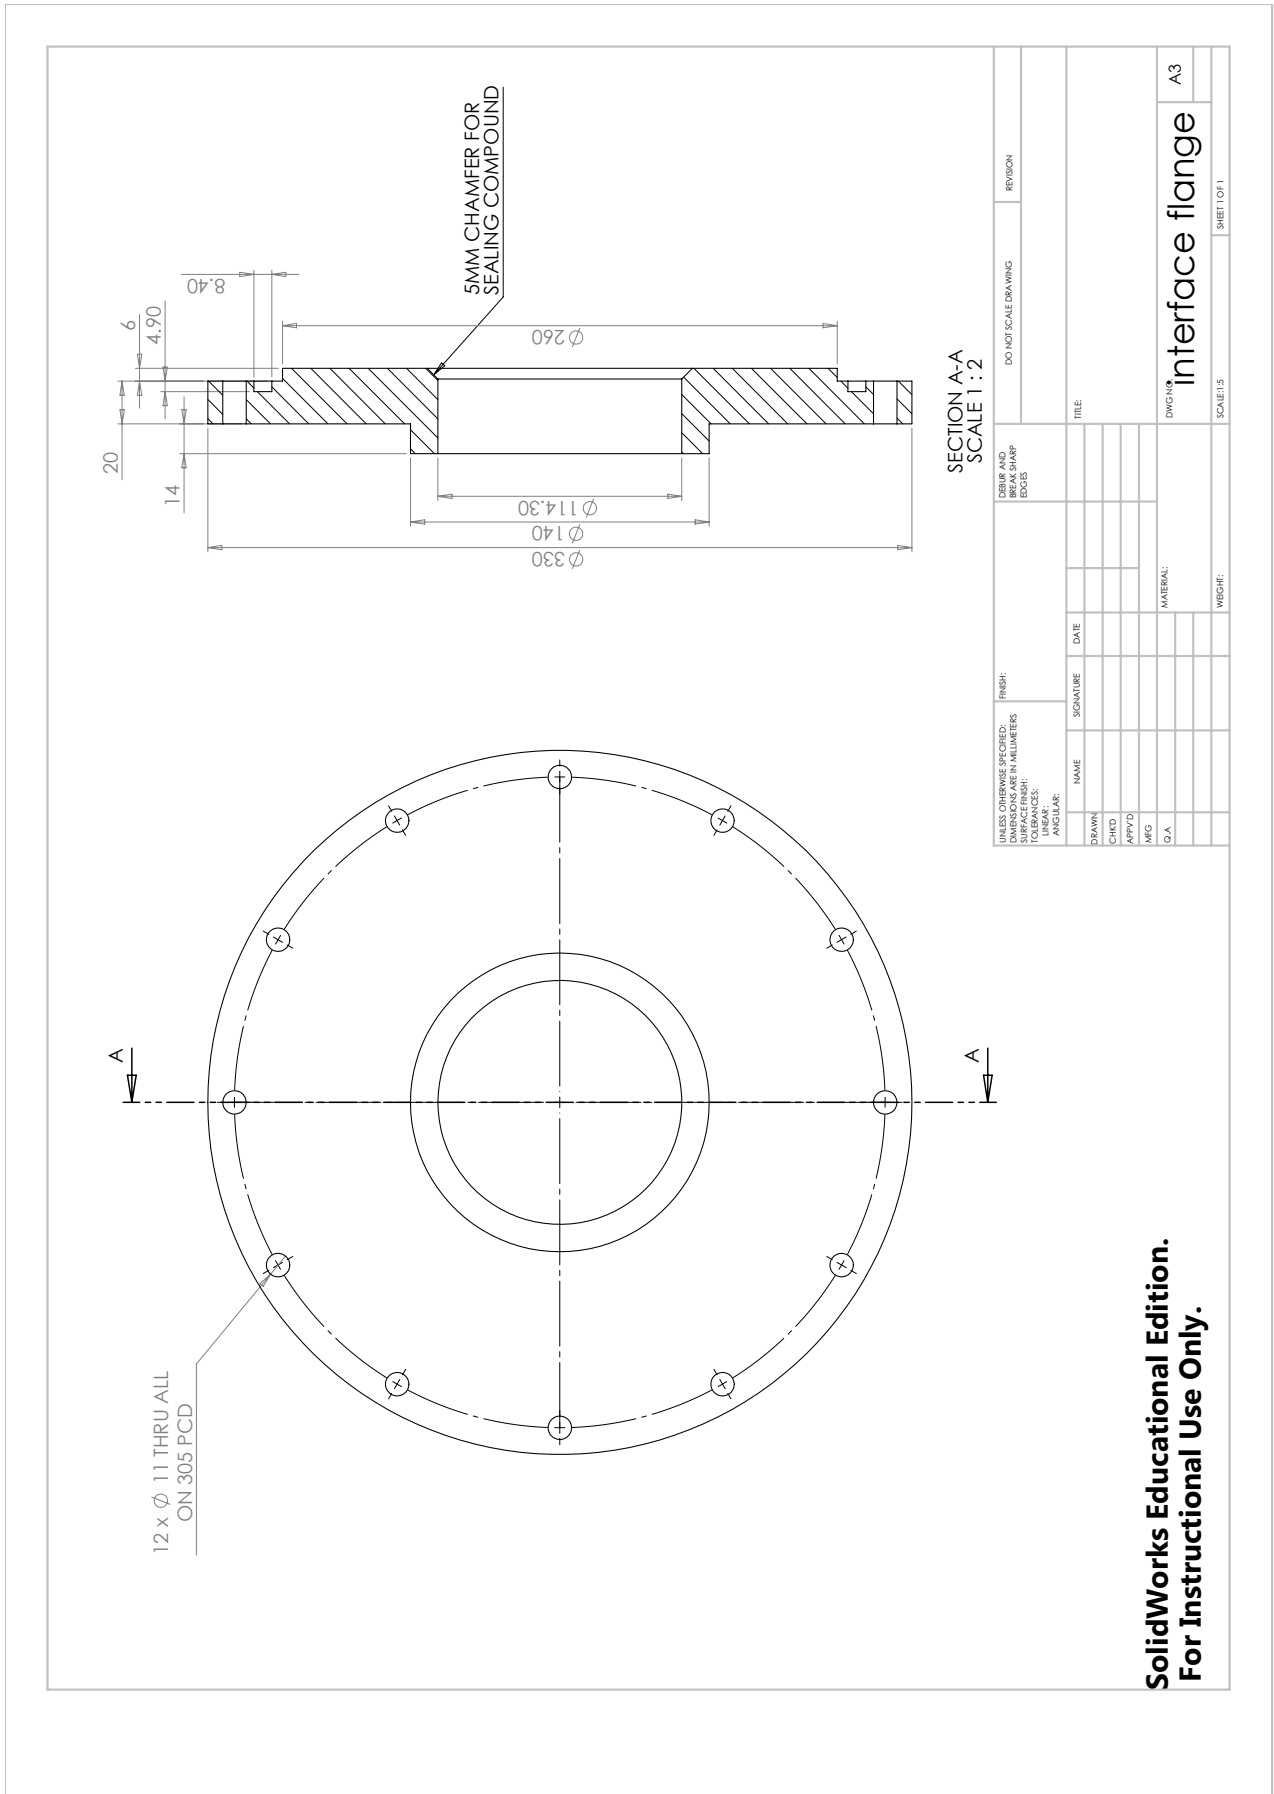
Schematic drawing of the interface flange for the new target cover.
